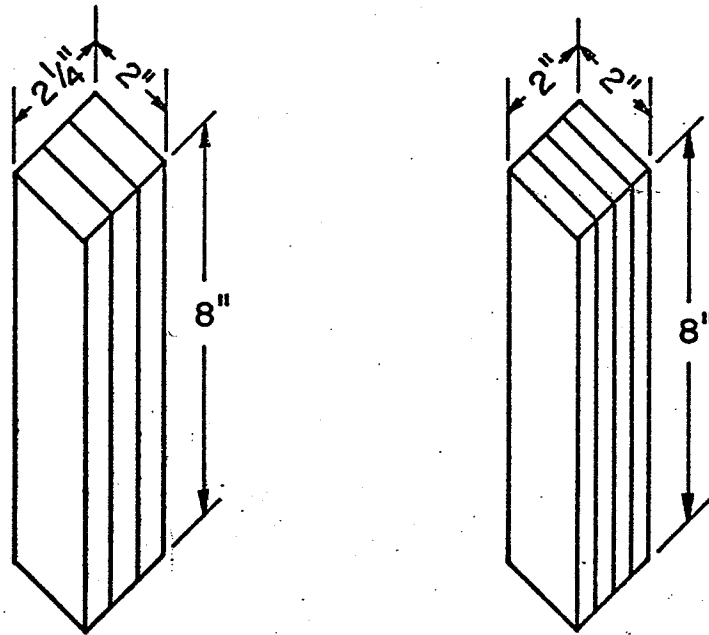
Assembly of Particleboard Specimen for
